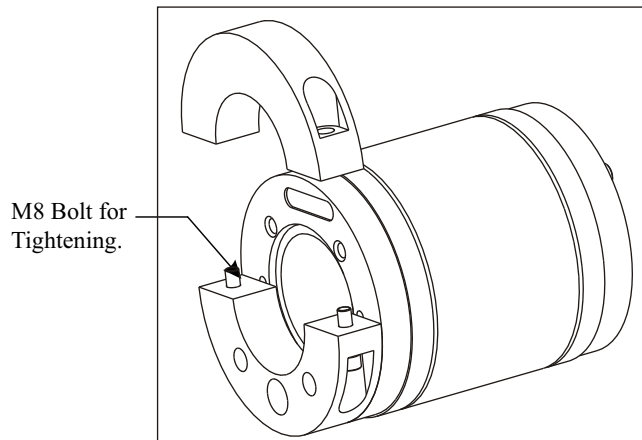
Air Chuck C-Clamp for Tightening it on to A Shaft. (For disassembly, just loosen the bolts, provide only 1-2 mm clearance.)
